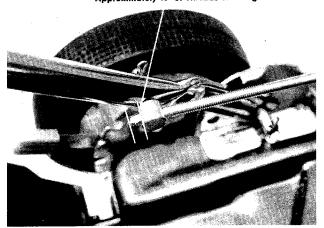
FIGURE E. CLUTCH ROD SETTING FOR THE MIDDLE CUTTING HEIGHT.
